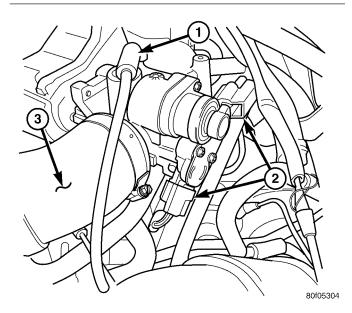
THROTTLE BODY CONNECTIONS - 2.4L TURBO
